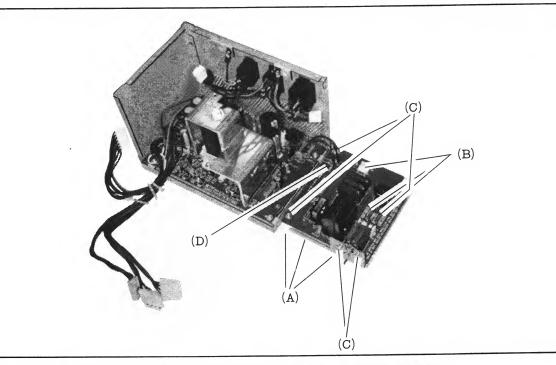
AC FILTER BOARD REMOVAL/REPLACEMENT
